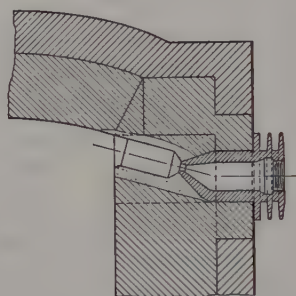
Burner nozzle spreading sheet of burning gases under arch.
